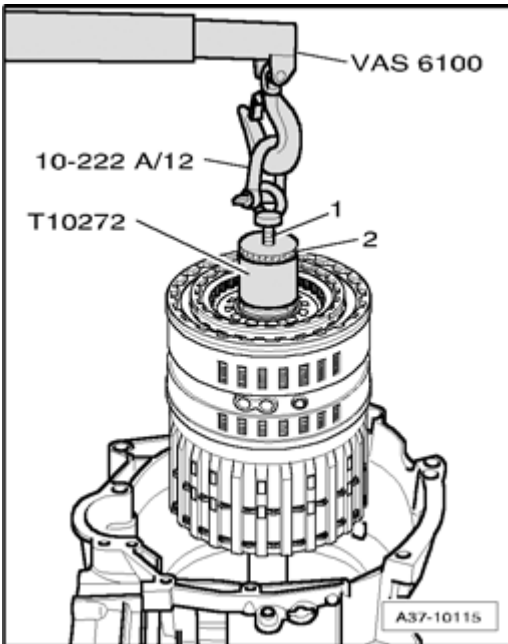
Removing/Installing Tower "I" Using Shop Crane VAS 6100
